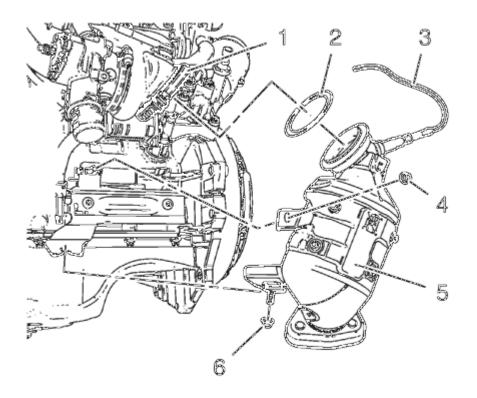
Exhaust Manifold Heat Shield Courtesy of GENERAL MOTORS COMPANY
